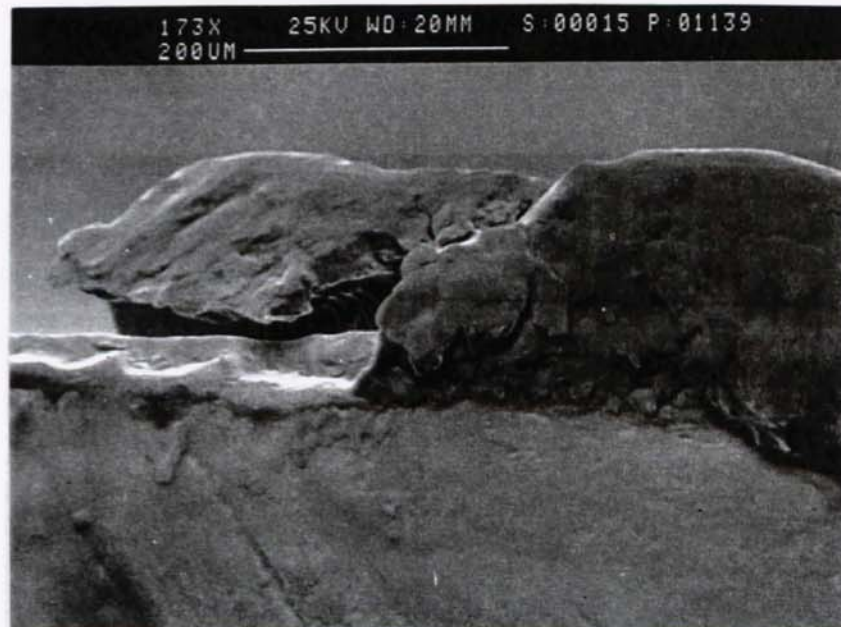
shows M2 HSS at the cutting speed of 10 m/min. The tool can be seen to have a BUE adhering to the cutting edge and flank wear. The BUE is adhered very strongly to the cutting edge, which is a fact well known that at low speed and the BUE is hard to dismantle. The BUE, as Boothroyd et al. (1989) suggest, begins to act as a cutting edge and performs the cutting action itself.
